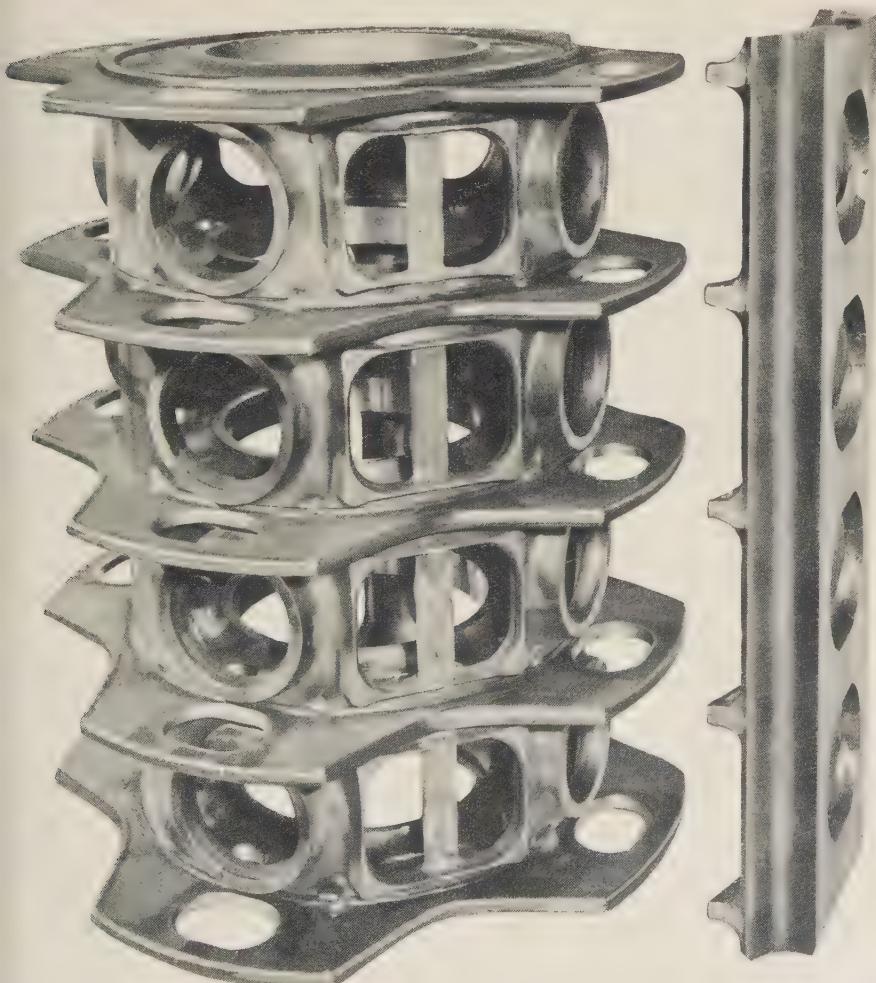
Relationship between the outer deck sub-assembly (right) and the stack-up sub-assembly (left). The flat surface of the outer deck sub-assembly is machined and the five ribs bored to a 16-in. radius to match the spokes on the stress members in the stack-up sub-assembly. The stack-up sub-assembly consists of five stress members and four inner deck sub-assemblies which are machined to nest together into a straight stack-up.
